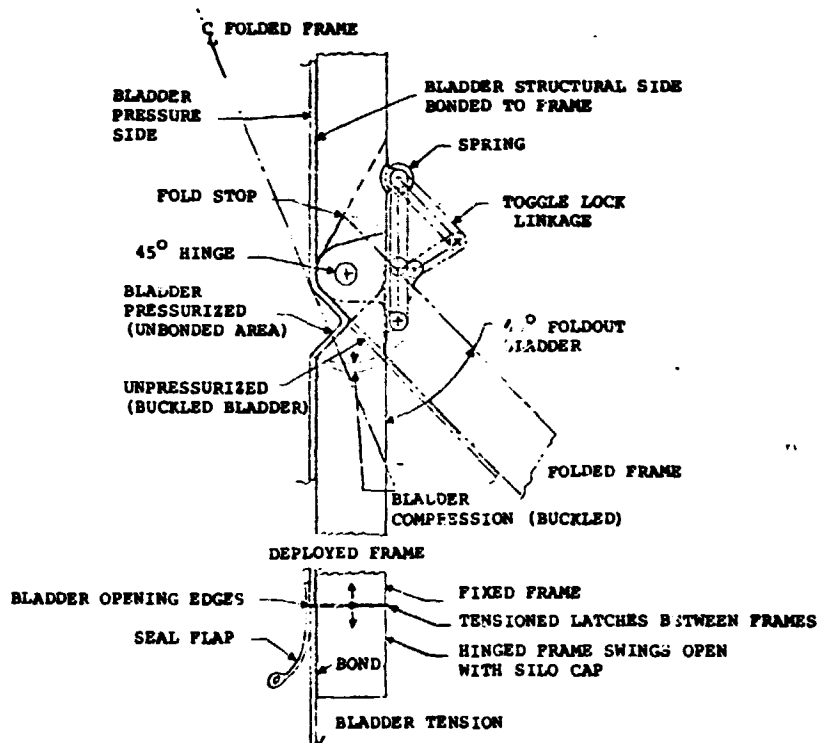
45° OUTSIDE BLADDER FRAME BEND-NO BLADDER STRETCH
